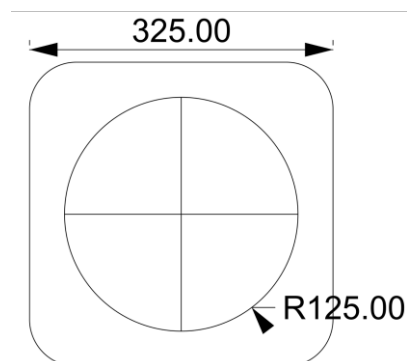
Tank Hatches for ballasting. Dimensions in mm
